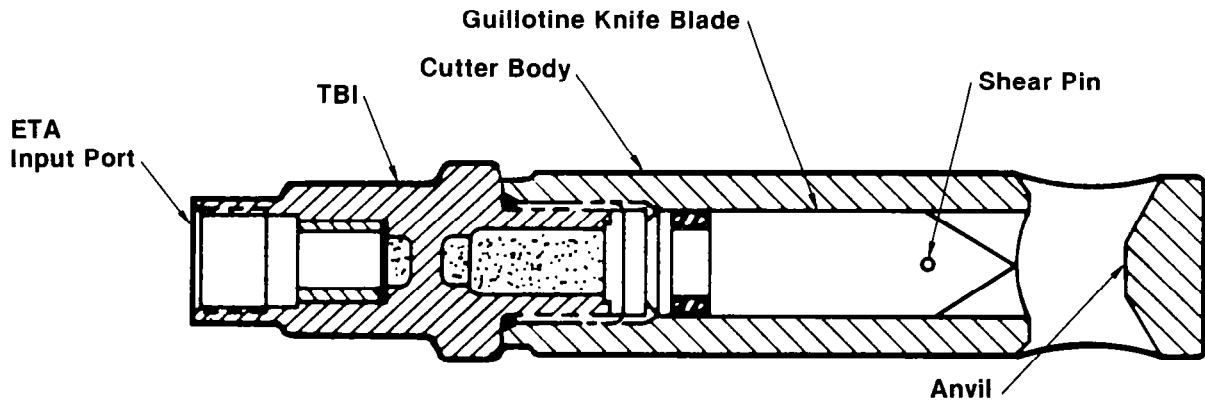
Through Bulkhead Initiator (TBI)/Bolt Cutter Cross Section
